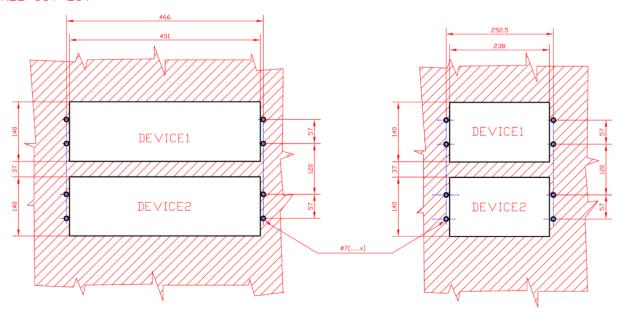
Dimensions for flush mounting of 84 HP and 42 HP single rack
